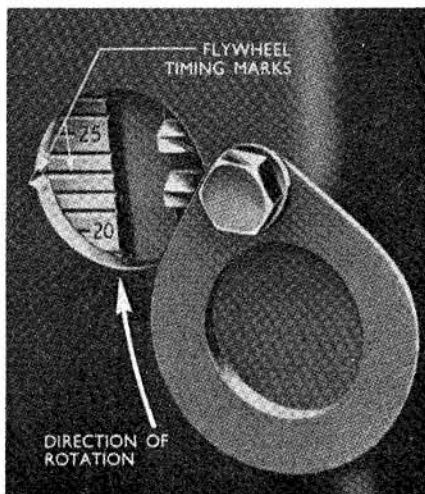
View with timing cover moved aside showing timing marks on engine flywheel and notch in engine pan. Refer to text for timing specifications and to Fig. 62 for fuel injection pump timing marks.
